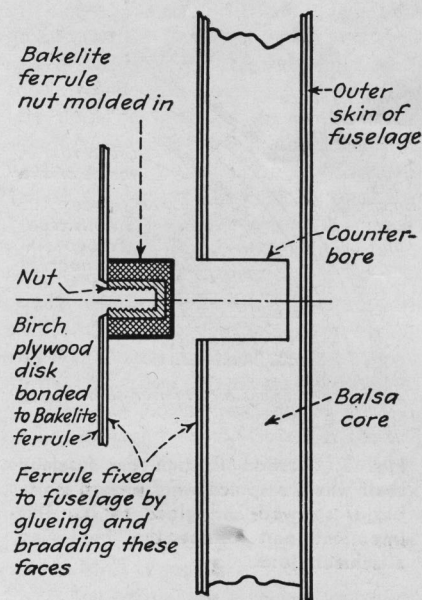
The unique method used in fastening the accessory mounting units in the wall of the fuselage.
